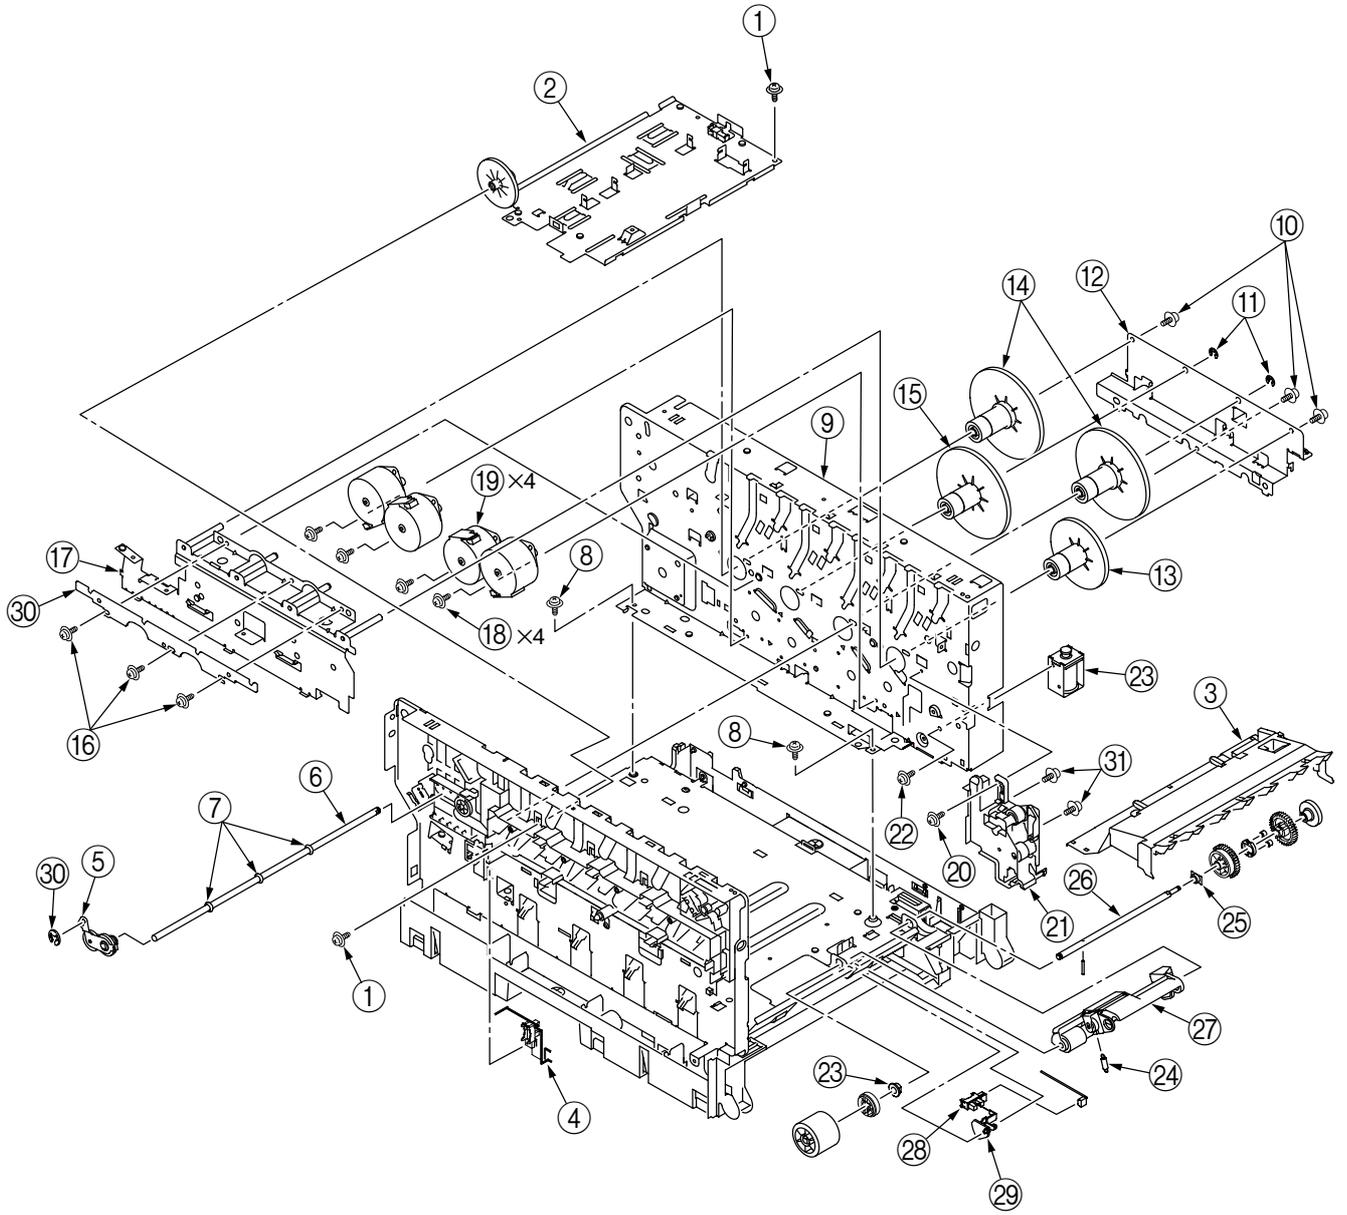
Main Motors / Solenoid / Paper-End Sensor
